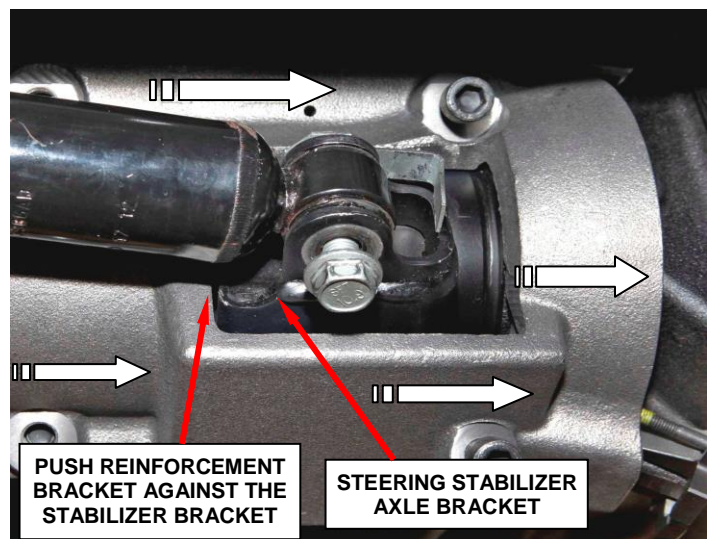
Reinforcement Bracket against Steering Stabilizer Axle Bracket
